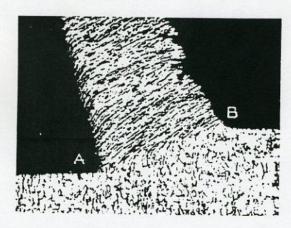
In the process of metal cutting, tool tip, A. produces chips above the line AB with no deformation of the metal below this line.
